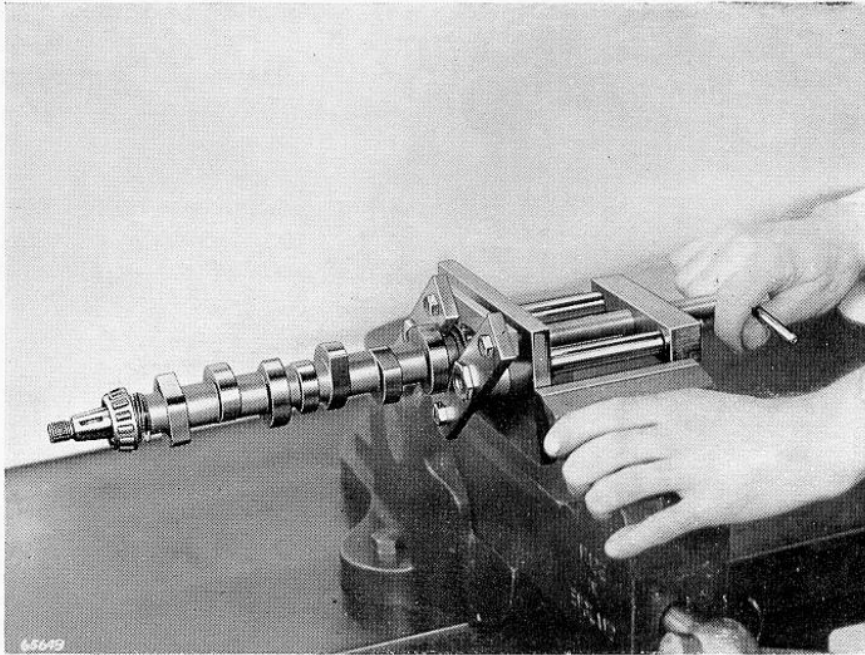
WITHDRAWING ROLLER RACE FROM CAMSHAFT USING TOOL 7144/436A
